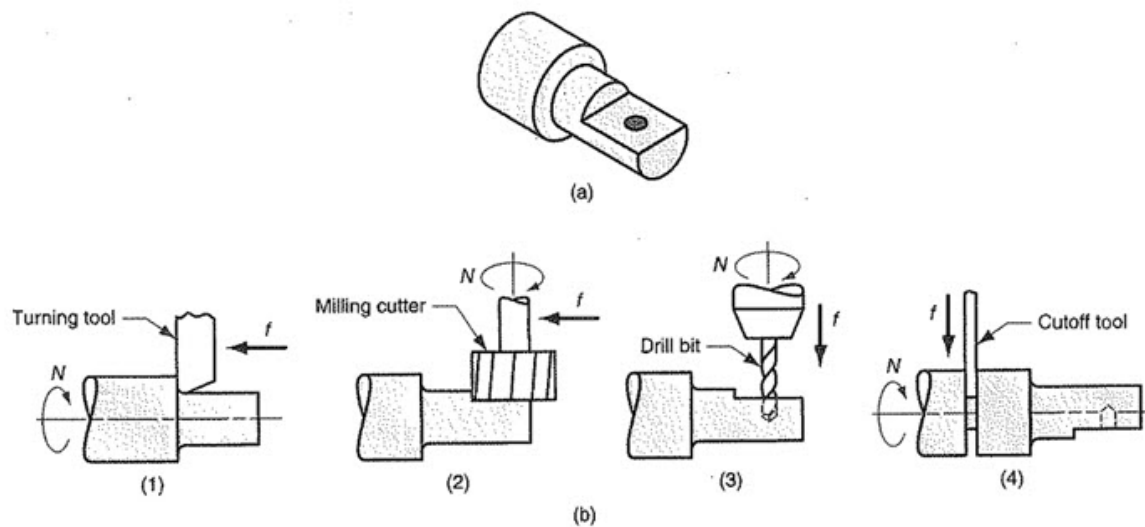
Operations of a mill-turn center: (a) example part with turned, milled, and drilled surfaces; and (b) sequence of operations on a mill-turn center: (1) turn second diameter, (2) mill flat with part in programmed angular position, (3) drill hole with part in same programmed position, and (4) cutoff.
